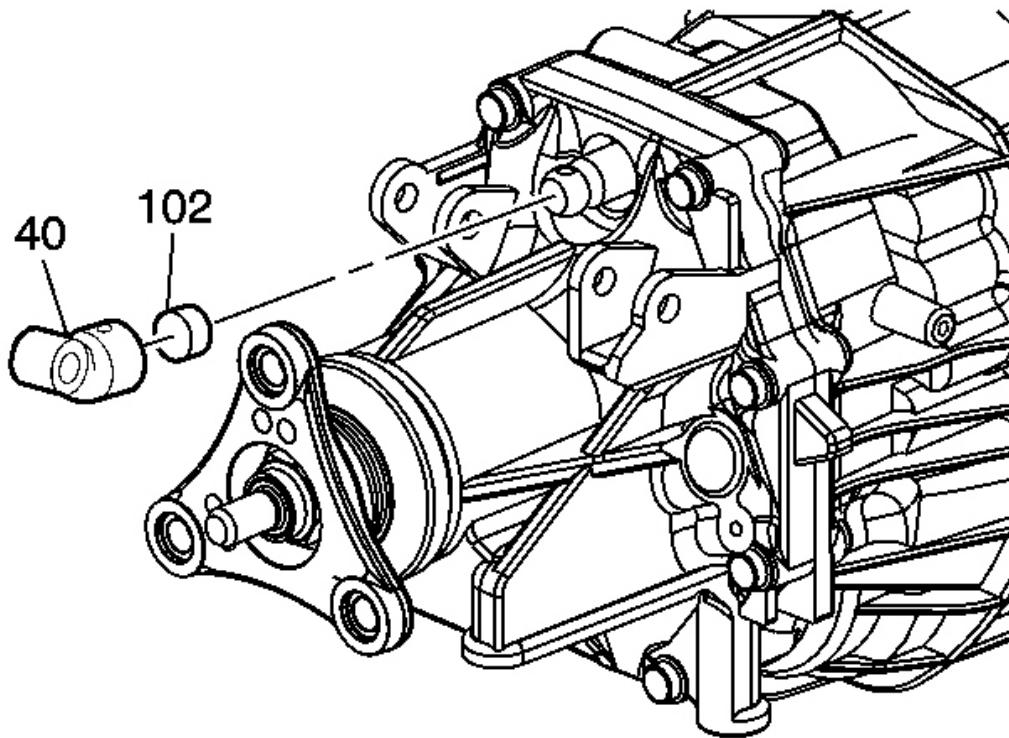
Shift Lever Rod Universal Joint & Dampener
